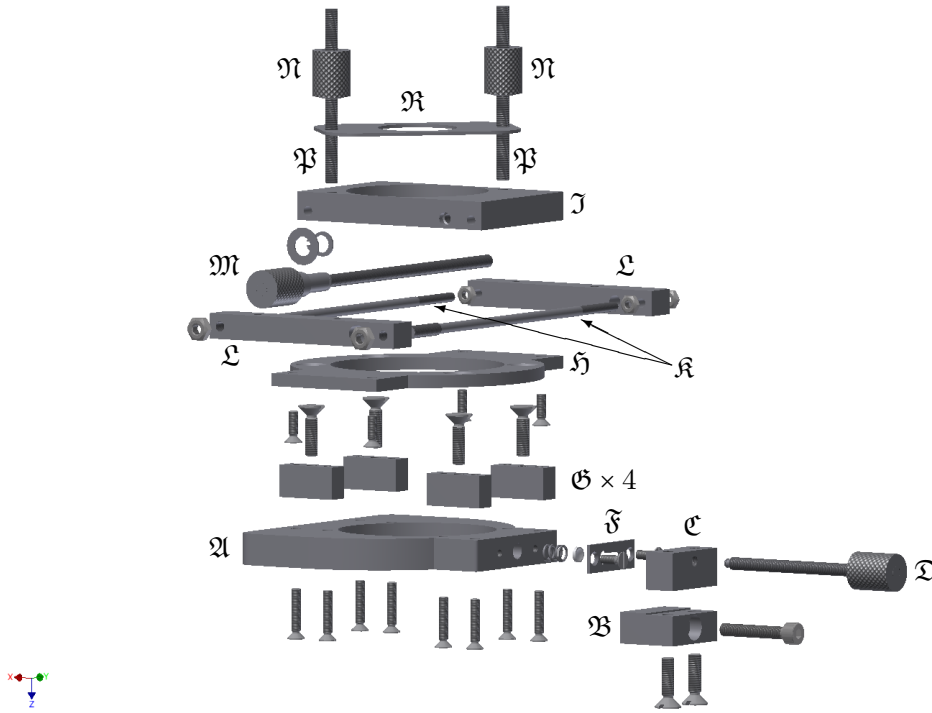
Assembly of the Photometer Mount — The socle plate (A, south) is mounted to the base plate (not shown) from Figure 2.43 by two small steel blocks (B, C). A spring loaded long screw (D), trapped by a plate (E), through one of the blocks allows defined lateral movement in one dimension of the remaining setup in this seat. Four spacers (G) and a secondary base plate (H) carry another moving component (I). This piece moves, guided by two rods (K) which are held by two bars (J) mounted to secondary base plate (H), on a threaded rod (M) perpendicular to the first degree of freedom. It also holds the detector^a (not shown), with two knurled nuts (N) on threaded rods (O) and a steel plate (P).
